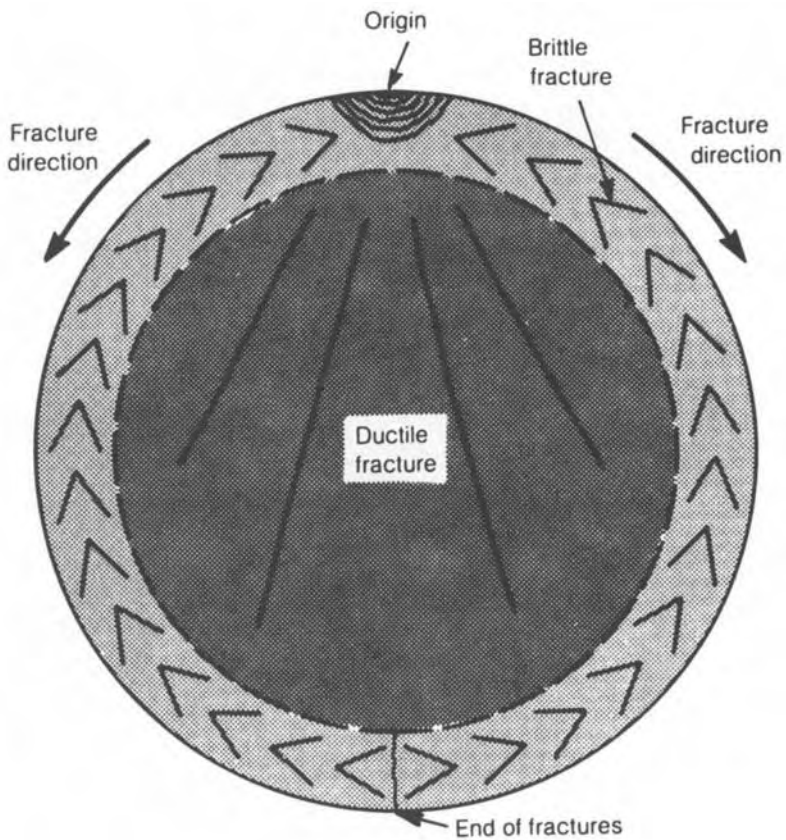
Sketch of a fractured case-hardened shaft showing chevron marks pointing back toward the fracture origin. If brittle fracture continues completely around the part, the two separate fractures may form a step where they meet opposite the origin. The interior, or core, is likely to have a ductile fracture with dimpled rupture on a microscale.
